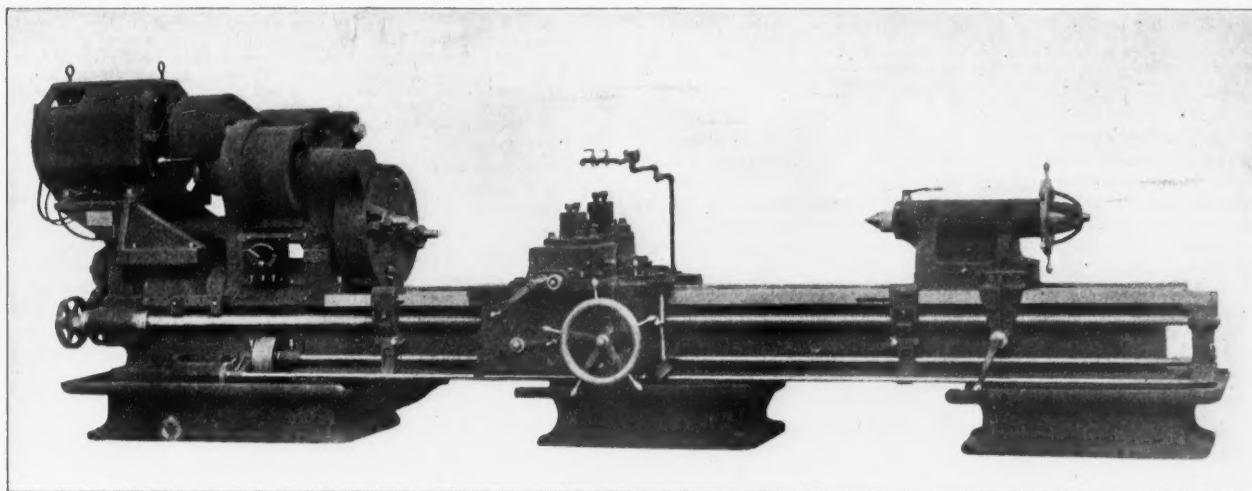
26-in. Engine Lathe Gear Driven From Variable Speed Motor.
